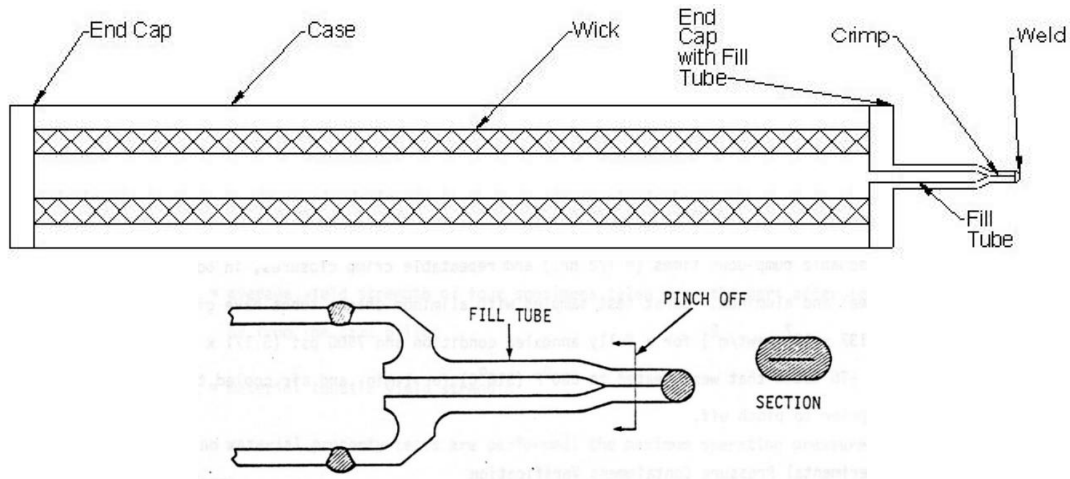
ABOVE A TYPICAL FILL TUBE WITH A CRIMP AND WELD TO ENSURE A FLUID TIGHT SEAL. BELOW IS A DETAILED CLOSE UP OF THE CRIMPED FILL TUBE [22].
